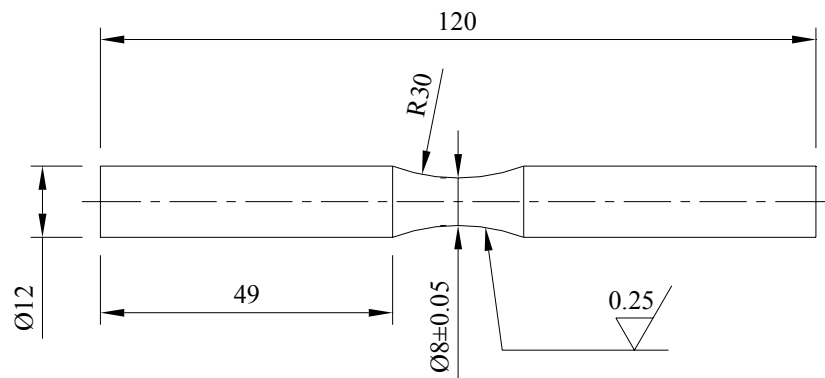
Dimensions of the 2011-T6 aluminium alloy specimens tested under rotating bending [3.39].
